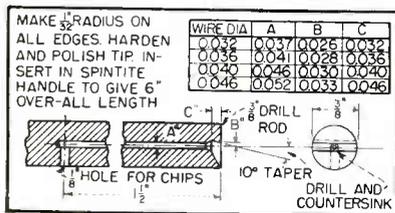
Machining specifications for resistor-paralleling tool. Dimensions vary with resistor leads as per table
